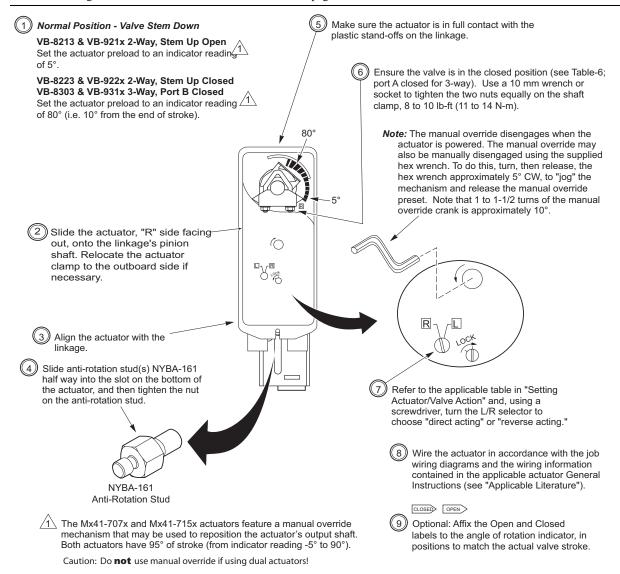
Mounting Mx41-707x or M41-715x and Setting Up Actuator/Linkage/Valve
